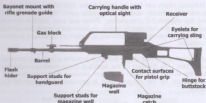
Receiver with barrel, buttstock and attaching parts.
